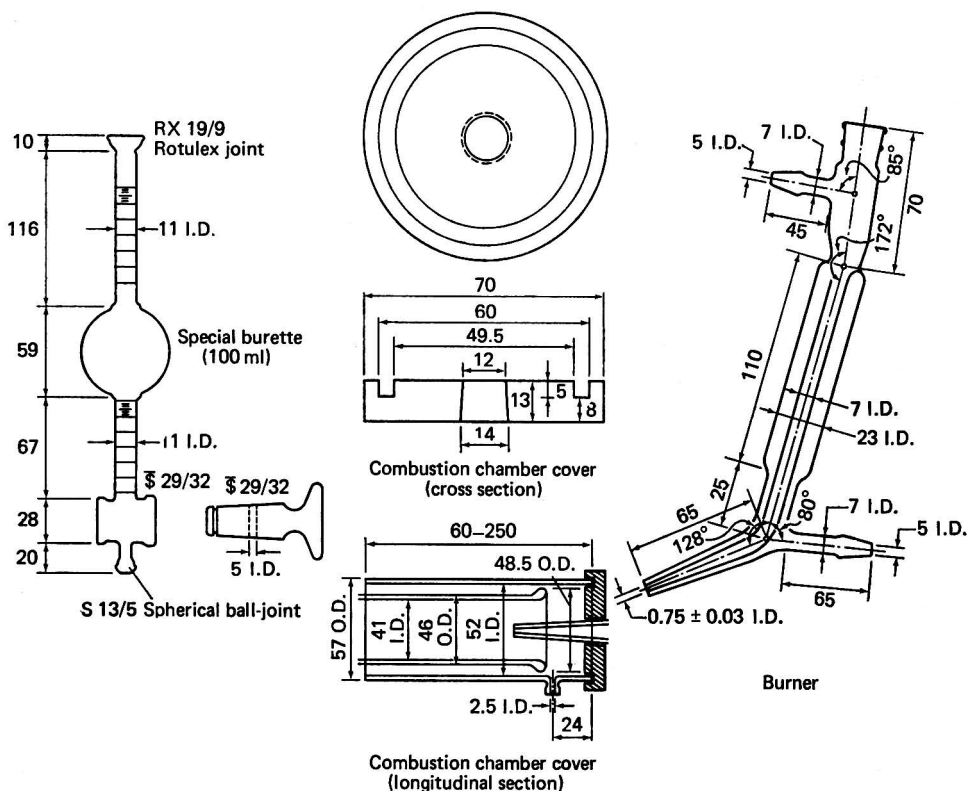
Details of combustion chamber, burner and special burette construction. All dimensions in millimetres.
